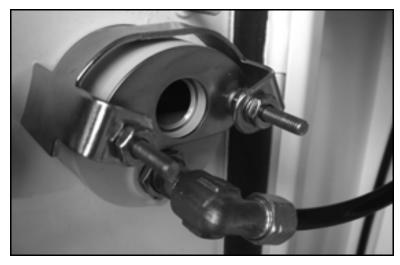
Remove the hose from the vacuum gauge, then remove the nuts holding it to the bracket.
